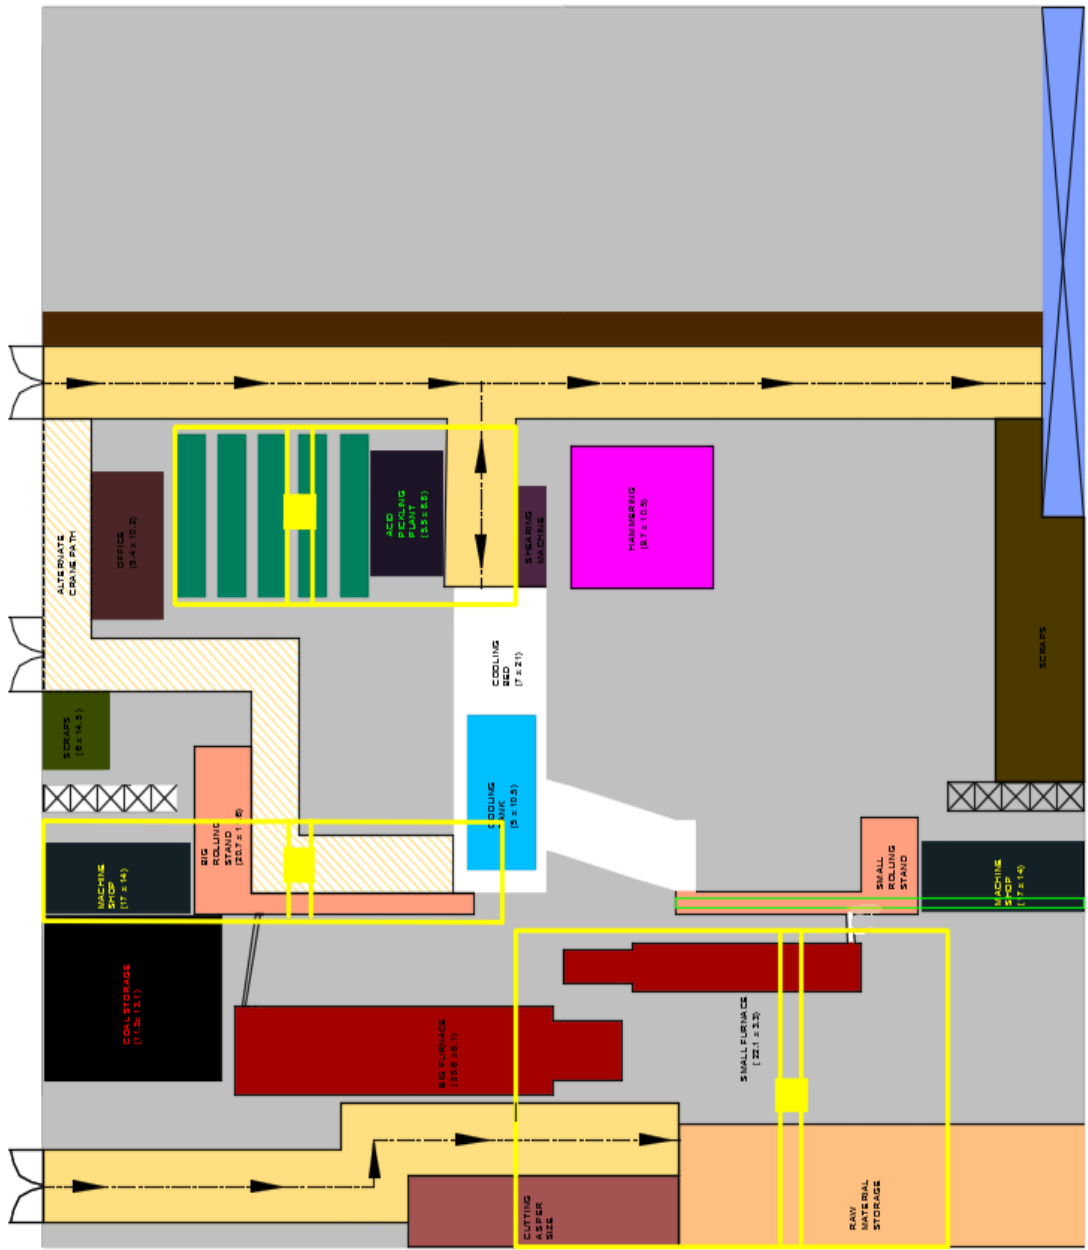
Proposed Plant Layout for Pratap Re-Rollers Pvt.Ltd.
